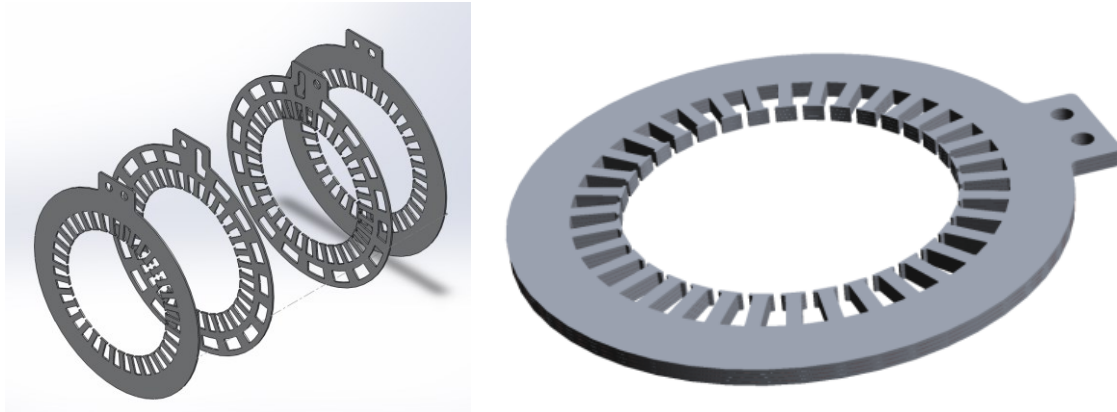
Single parts of the heat sinks assembly (left) and assembly (right)
